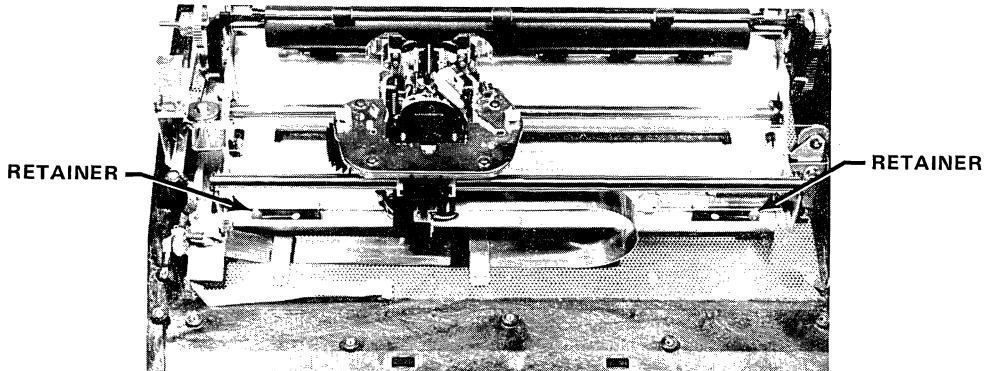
PRINT MECHANISM FRONT RETAINERS
